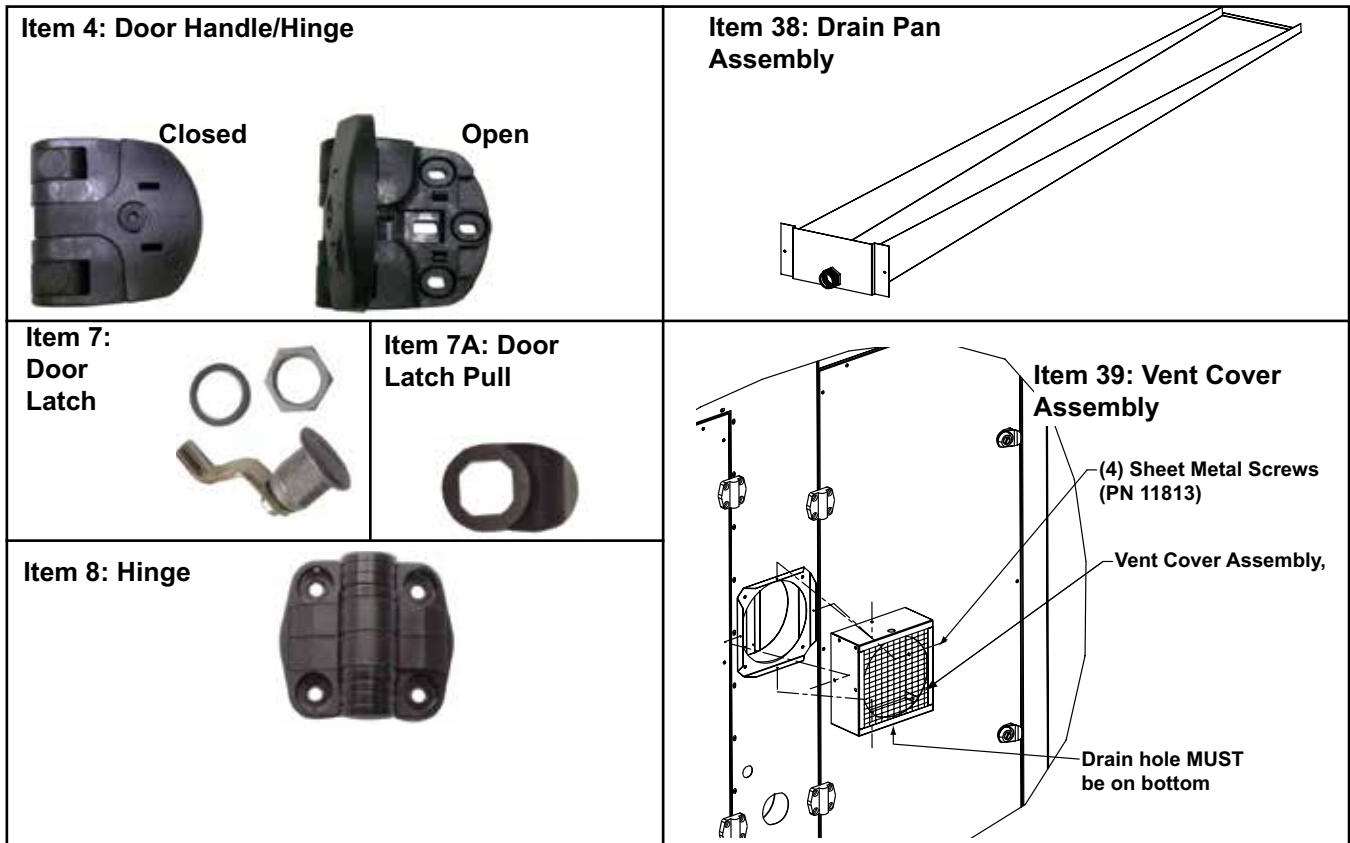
External Cabinet Parts—Cabinet D (Refer to Table 46)
